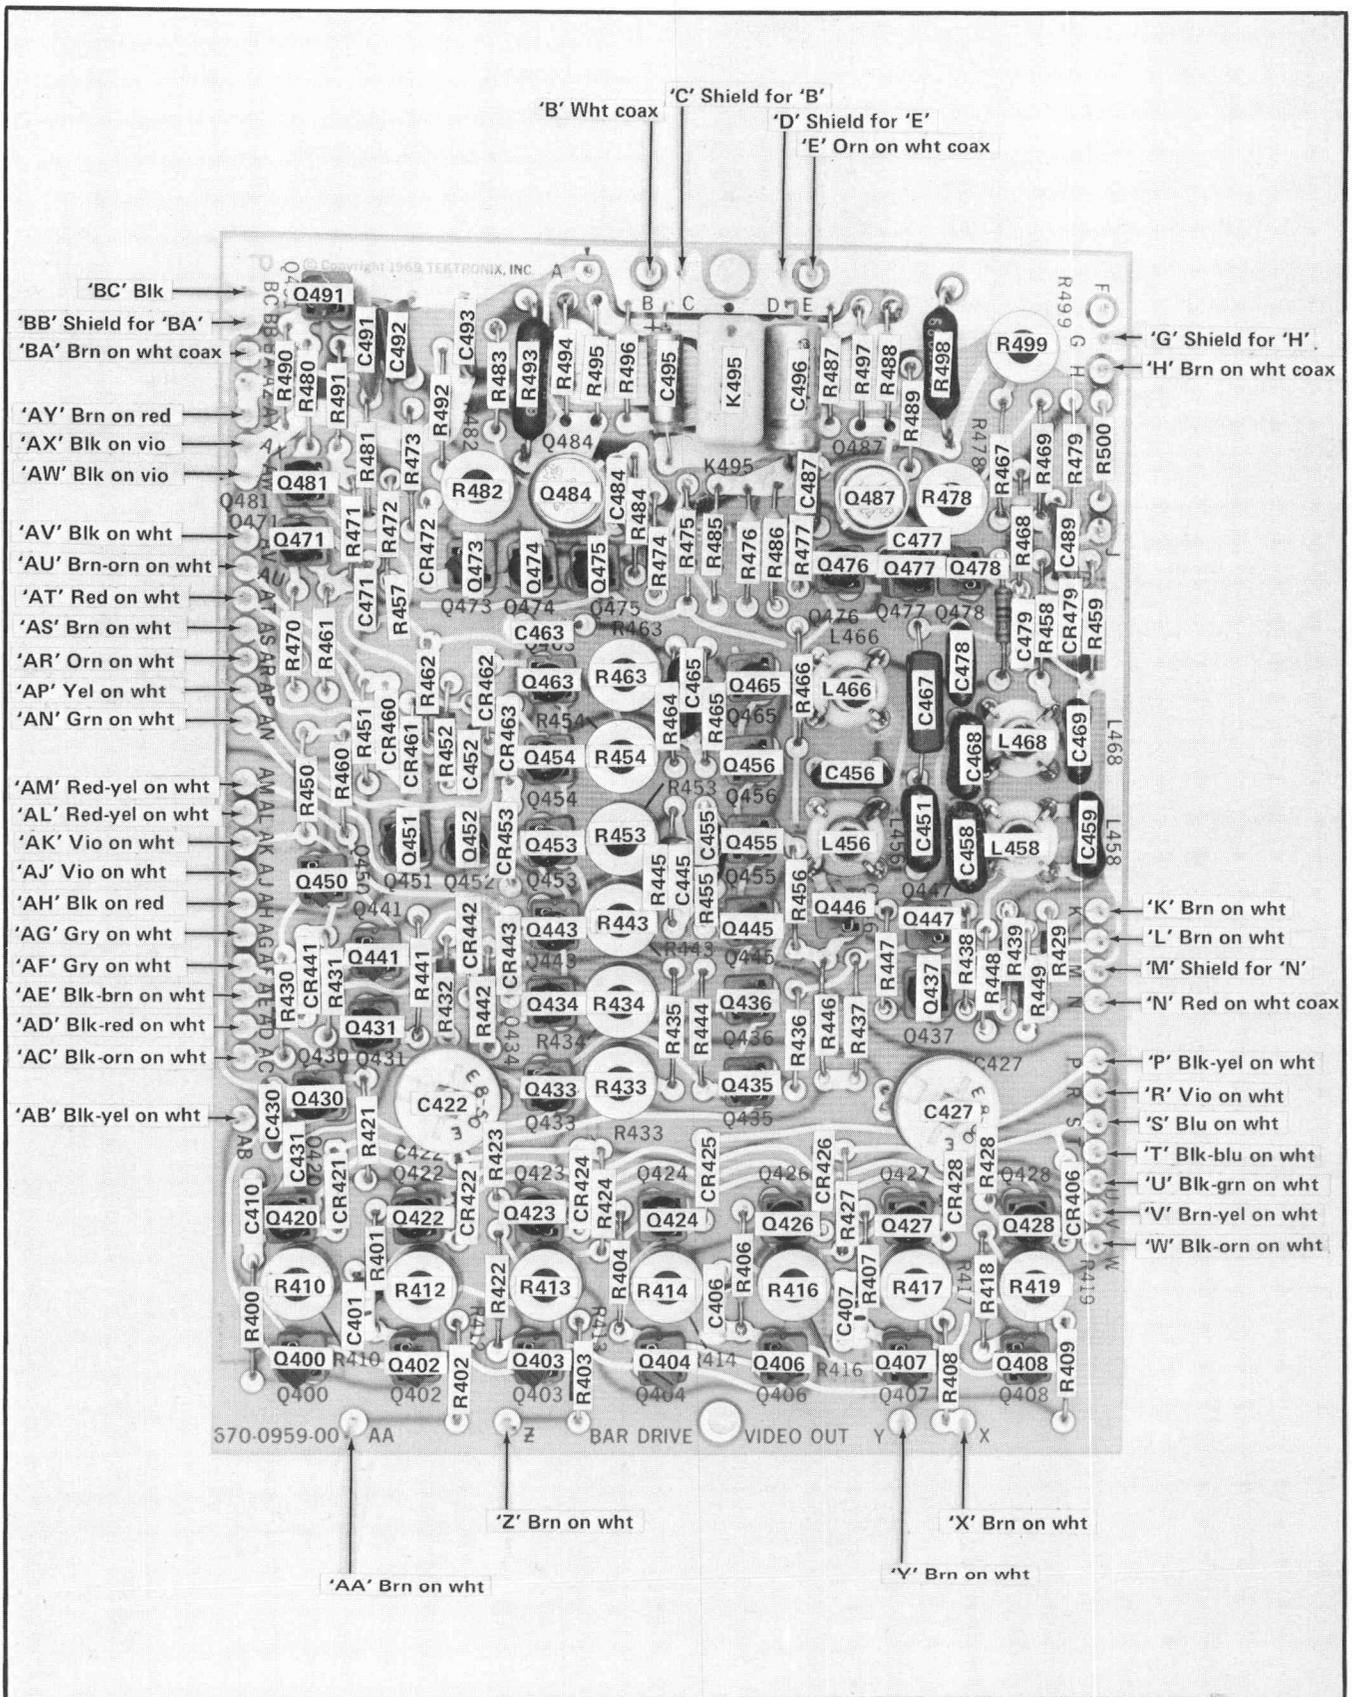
BAR DRIVE and VIDEO OUT board; component identification and wire color code.
